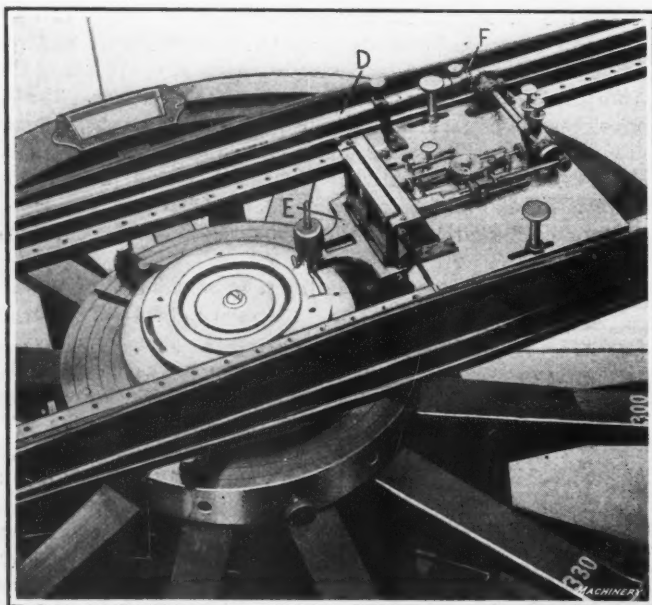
Close View of Tool Carriage Mechanism of Graduating Machine shown in Fig. 4
